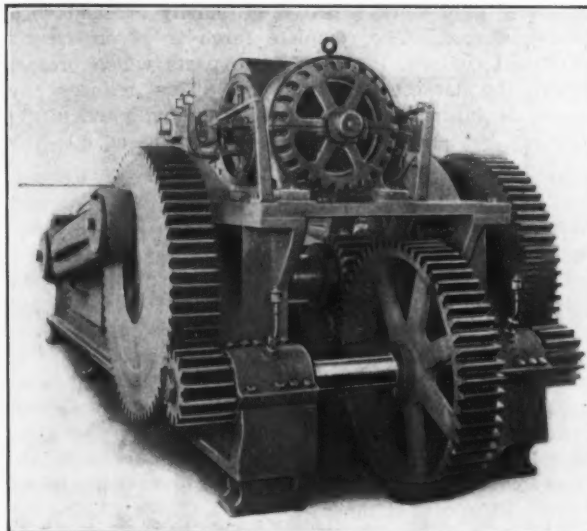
Rear View of the No. 12 Ajax Bulldozer, Showing the Driving Motor.
